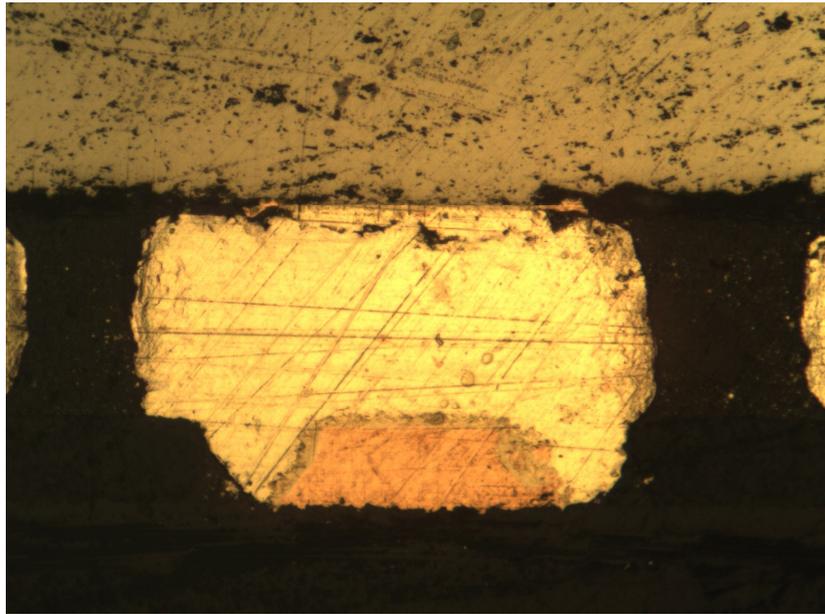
Hot Melt 2 on FLEX Test Board CSP Image
